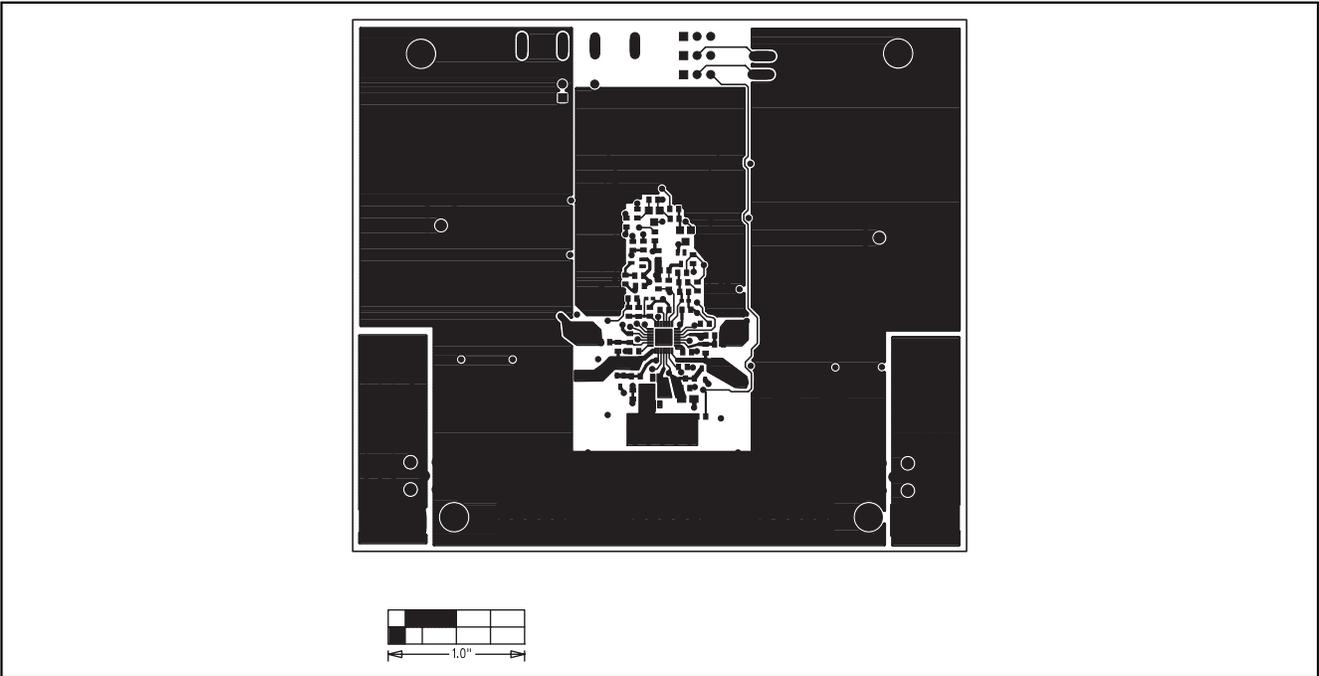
MAX1955 EV Kit PC Board Layout—Solder Side
